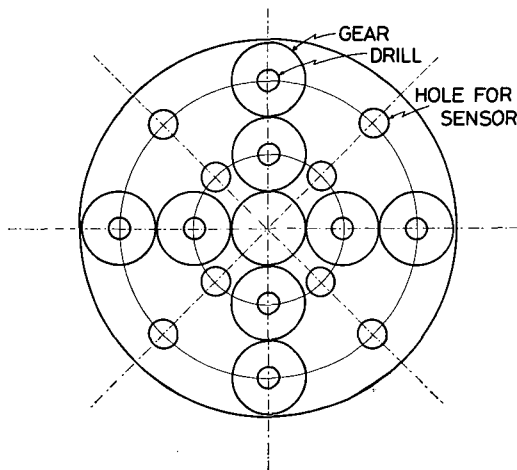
Gear pattern of the drill head shown in Fig. 3. After drilling, we rotate the drill head 45° and insert the sensor rods attached to the drill head, passing through the holes of the head, to the sensor holes.
